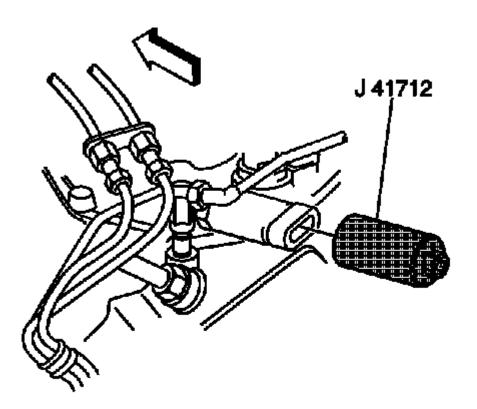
View Of J 41712 Installing The Fuel Pump/Oil Pressure Sensor Courtesy of GENERAL MOTORS CORP.
